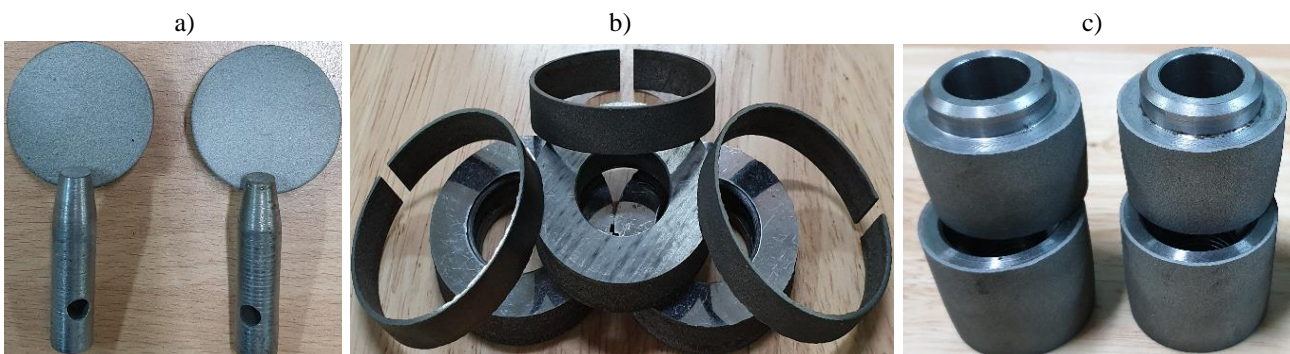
Samples after measurement: a) dolly is burst out after pulling, b) coating is separated after compression, c) coating is broken
